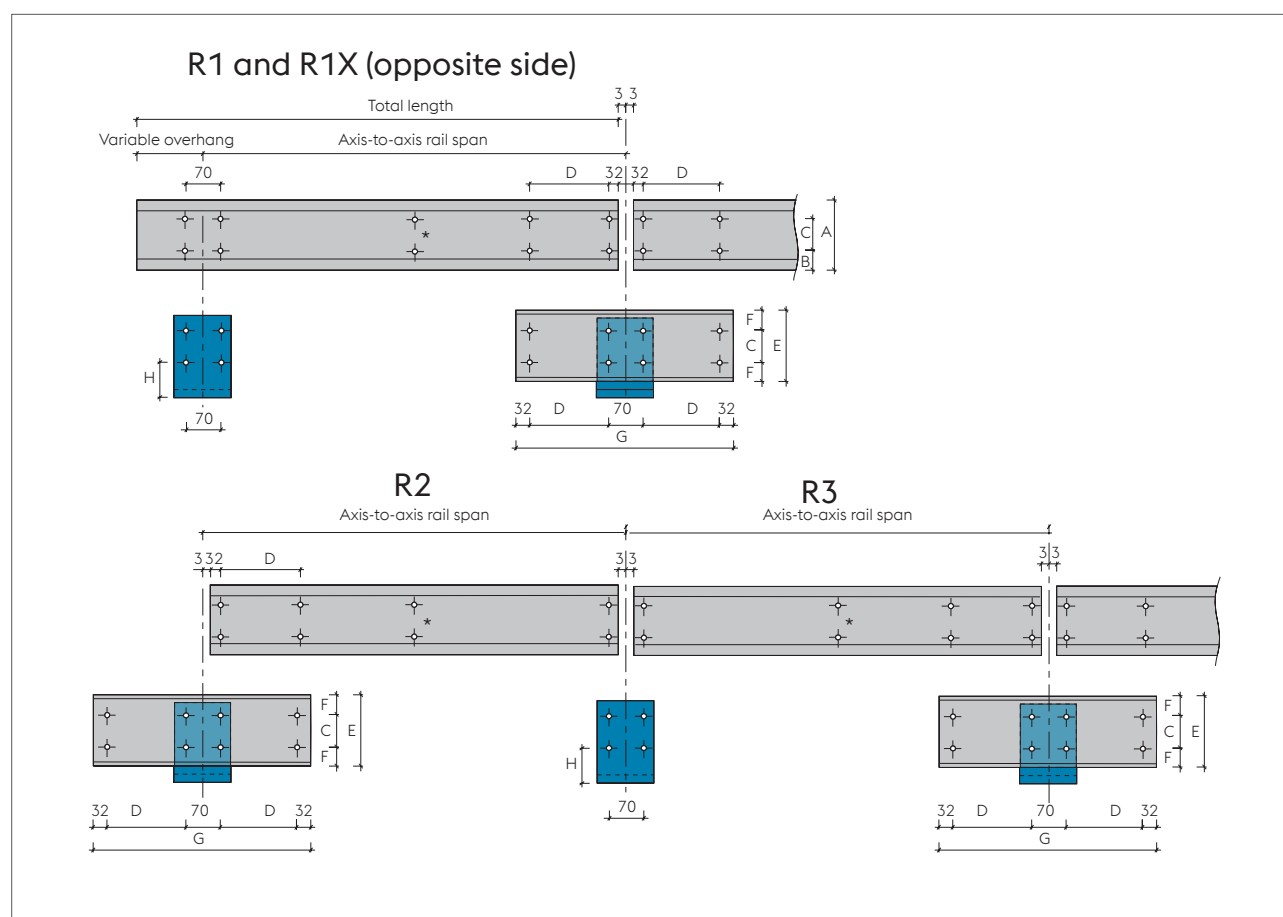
Design details of the SLEEVED side rail system of C sections
